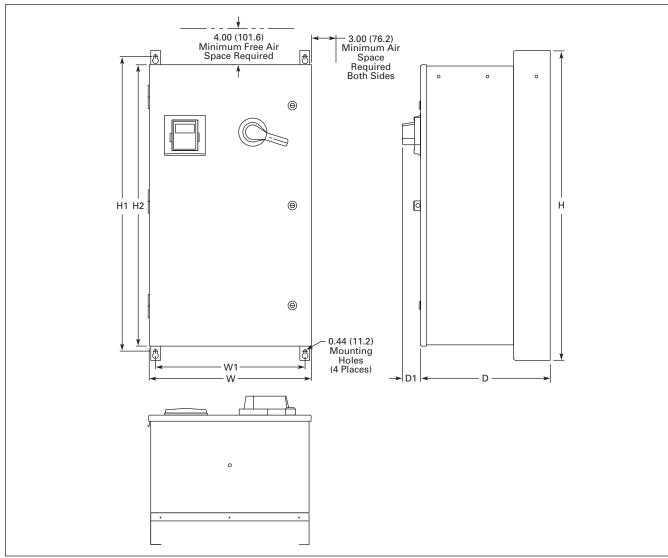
Enclosure Box B — UL Type 12 Dimensions
